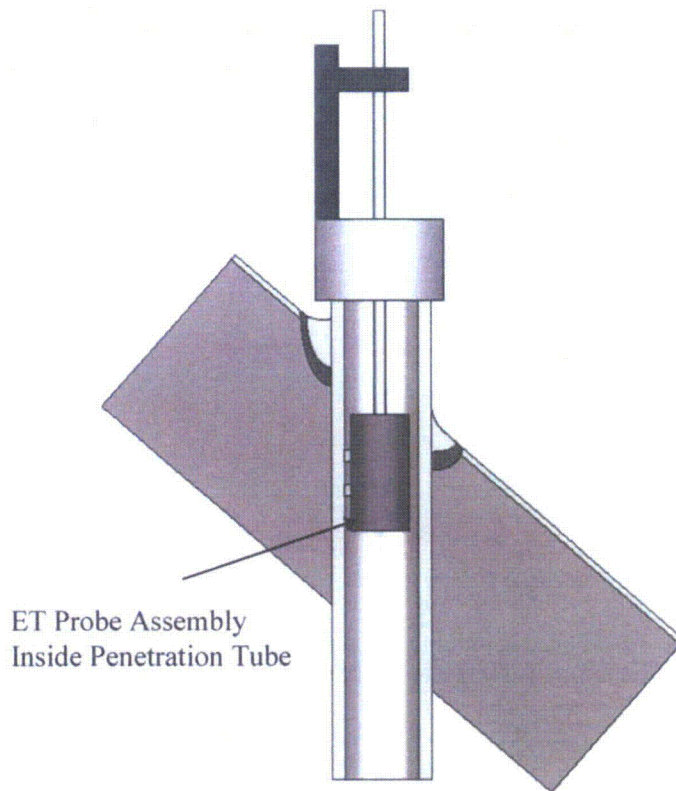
How the ET Assembly Fits in the Penetration Tube
